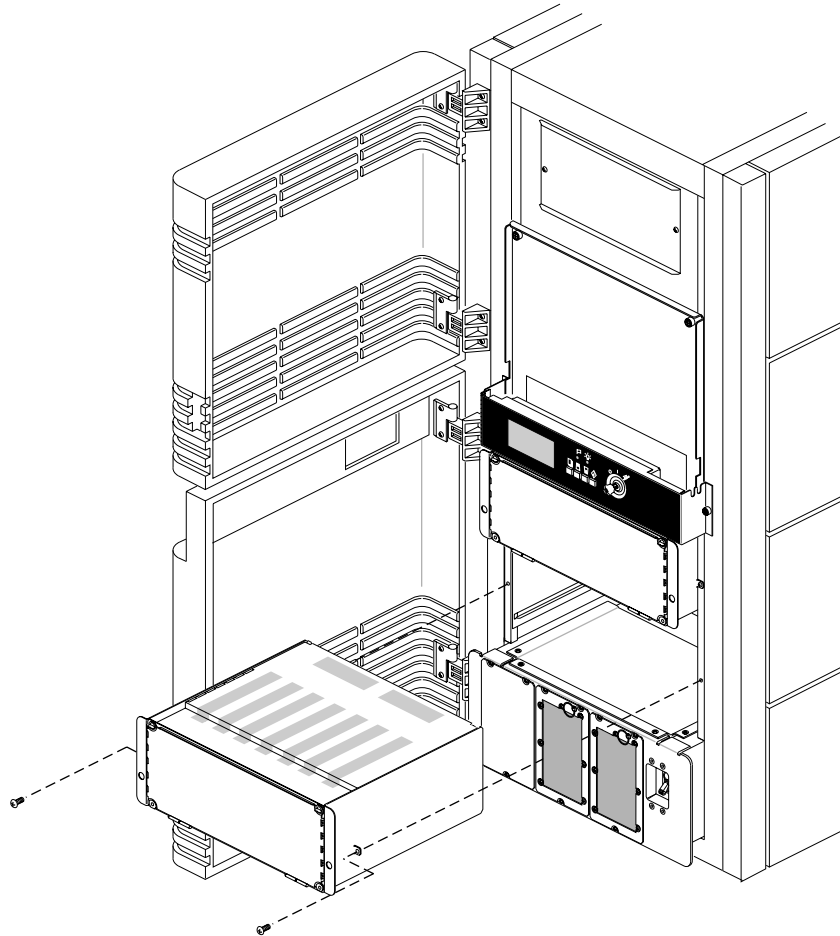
Installing or Removing the Optional SCSI Drive Box
